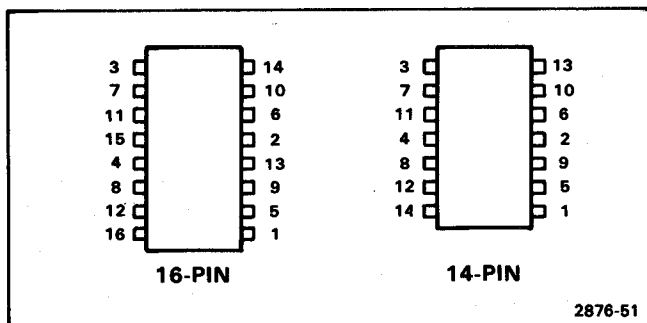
Recommended desoldering sequence for multi-pin devices.
